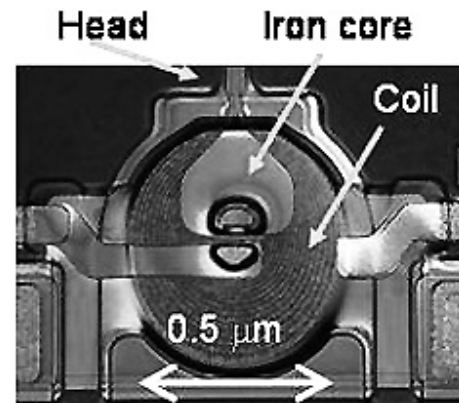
Magnified photo of a pickup coil for hard disk fabricated by the ion beam milling system (The photo offered by AE KiKi Engineering Co Ltd.).
